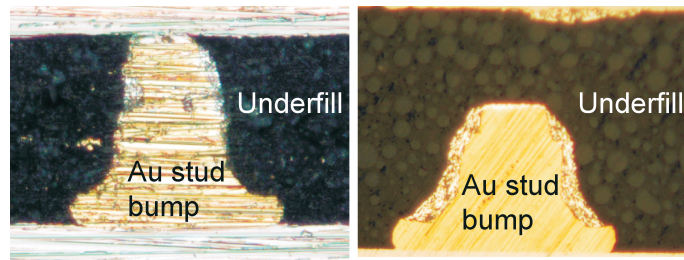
Microscope image of a cut through the bumps between the SU-8 chip and PCB after flip chip bonding using an underfill. Left: Electrical interconnection was formed when the bump was in contact with the wires on the PCB. Right: Unfortunately, most of the time the underfill lifted the chip from the PCB and damaged the interconnection.
